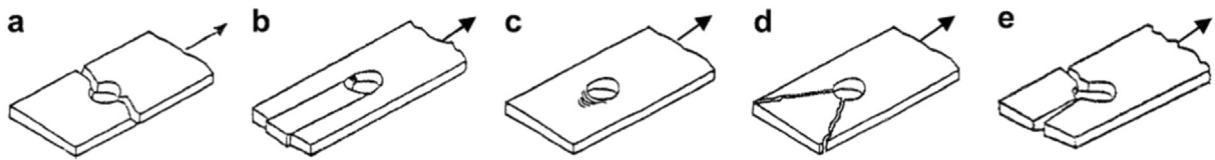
Common bearing test failure modes (a) lateral (net-tension), (b) shearout, (c) bearing, (d) tearout and (e) cleavage [51].
